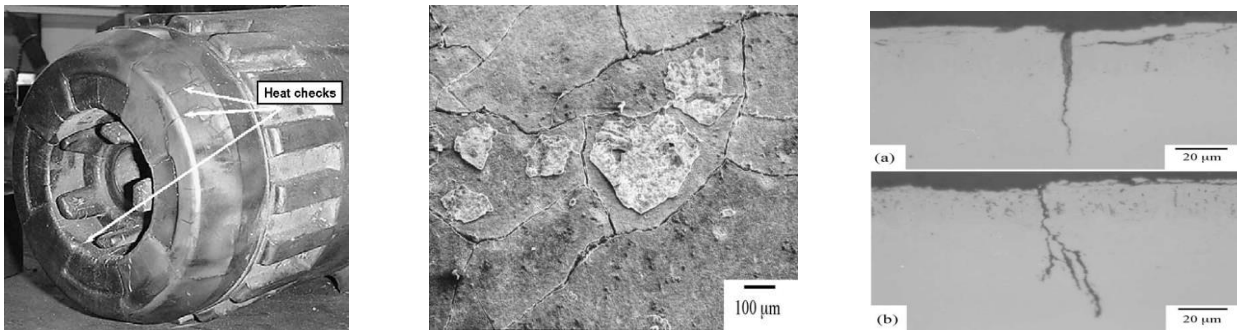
a) Cracks in transmission die [2], b) surface cracking detail [5] and c) polished cross-section revealing typical thermal cracks [5]
